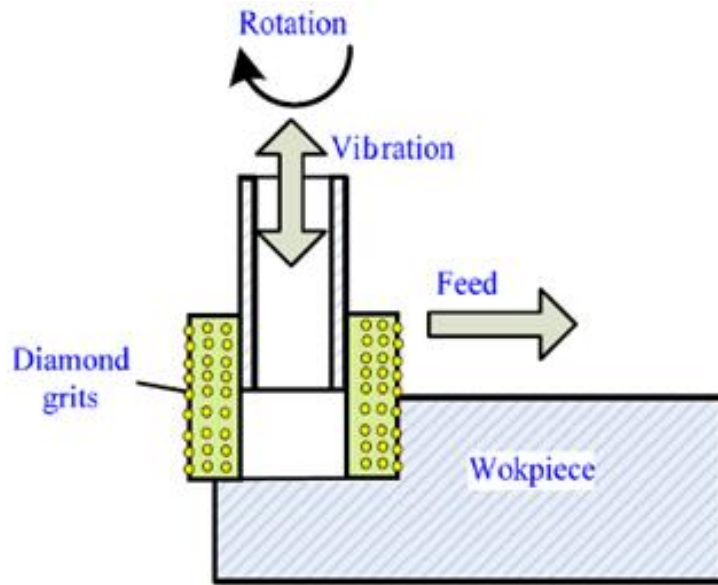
Illustration of rotary ultrasonic machining during side milling (Gong et al., 2010)
